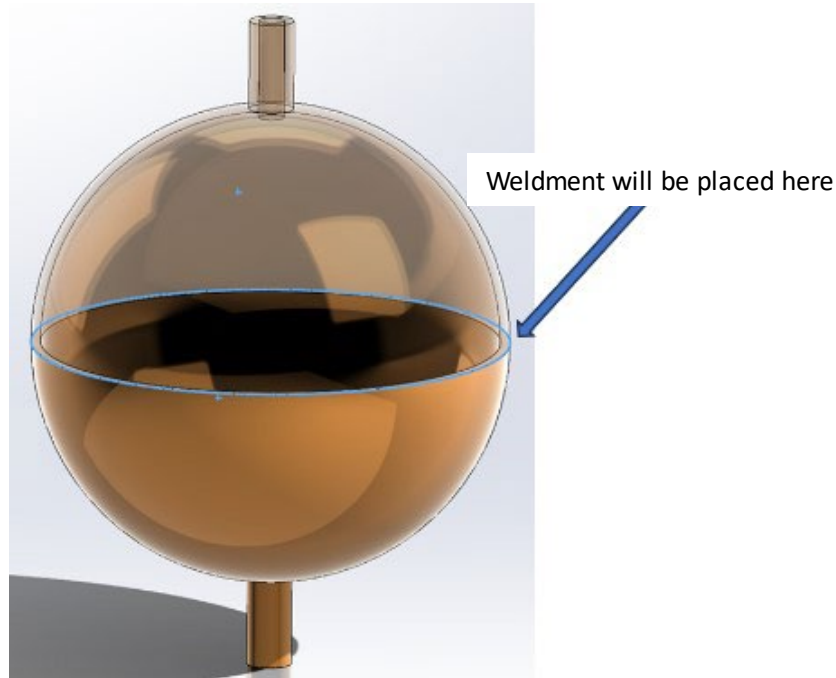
Two hemispheres seated together to show how the part will look. The placement of the weldment is also annotated.
